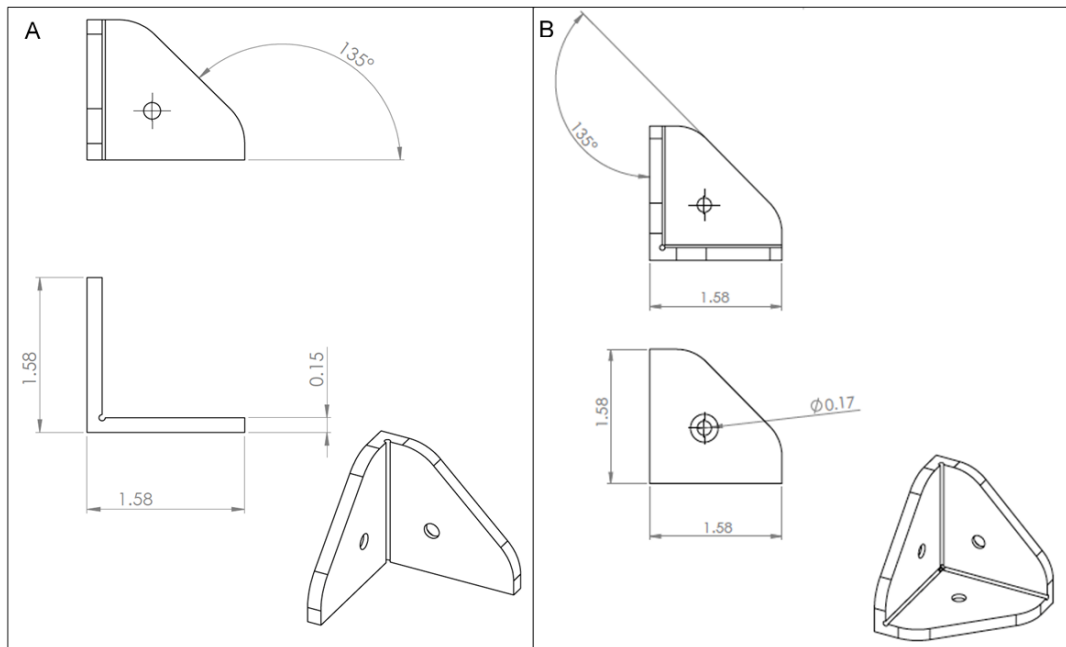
Dimensions (in mm) of 3D printed corner options: (A) double corner to affix panels adjoining the door and (B) multi corner used to secure three panels throughout the remainder of the collection unit.
